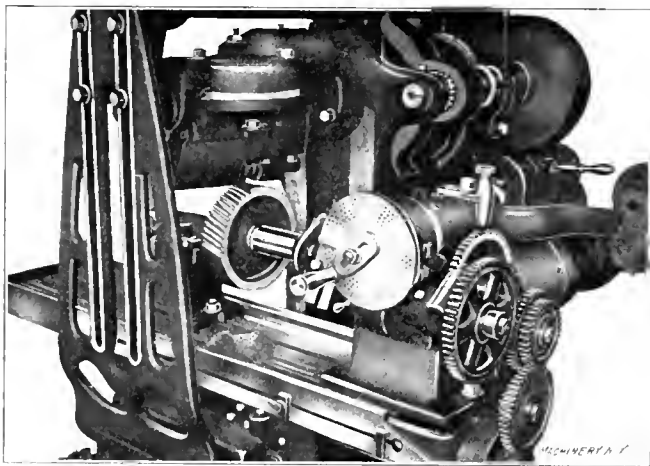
Cutting a Spiral Gear of Large Diameter and Large Lead.
